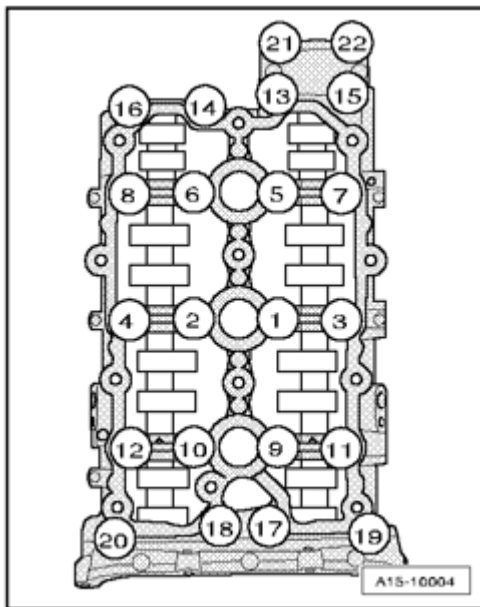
Loosening/Tightening Guide Frame Bolts In Sequence
